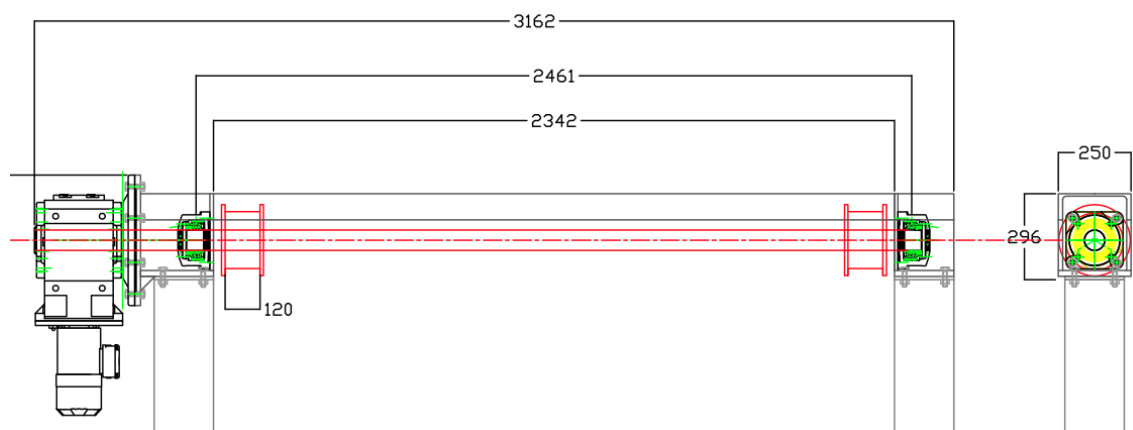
Plan and elevation view of hoist structure with components mounted.
